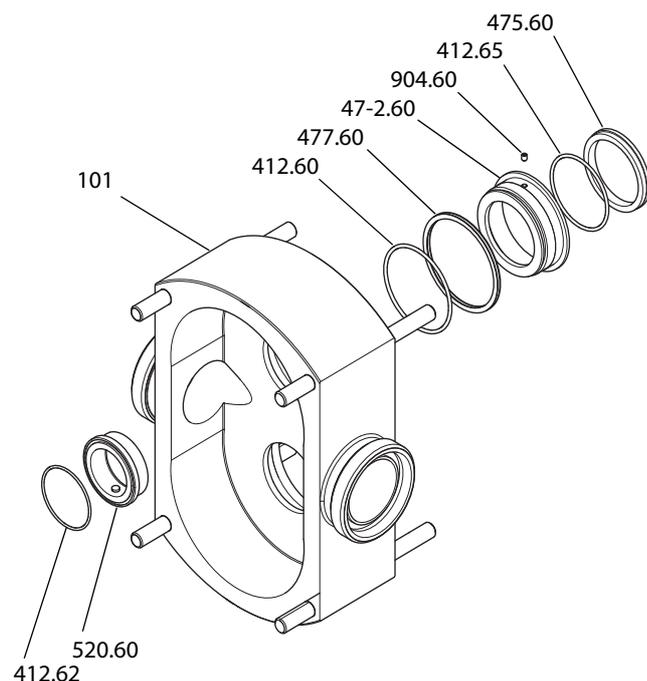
Preassembly in the pump casing and final assembly on the shaft, application case A
